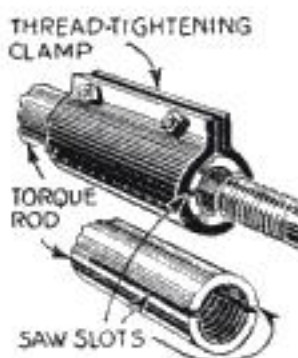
A simple clamp device that can be used to repair a stripped torque rod
